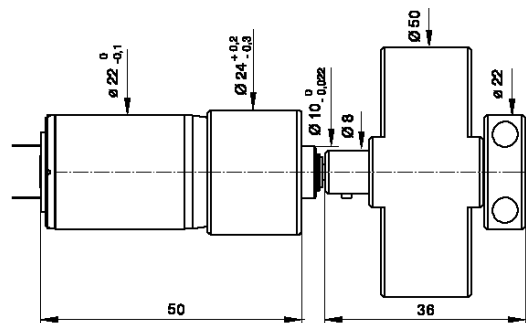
The motor connected to the gearbox, which is connected to the wheel axle, the wheel and finally the bearing.
